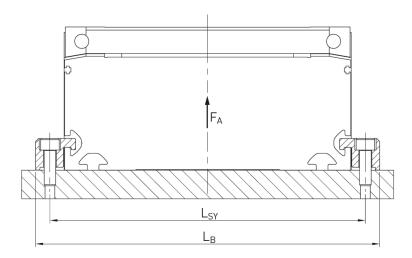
Mounting with clamping profiles - HT100S, HT150S
